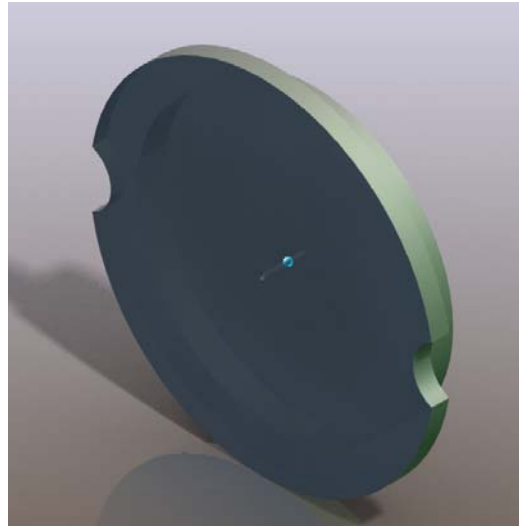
Custom-machined wind tunnel port for testing single Kiel probes.
